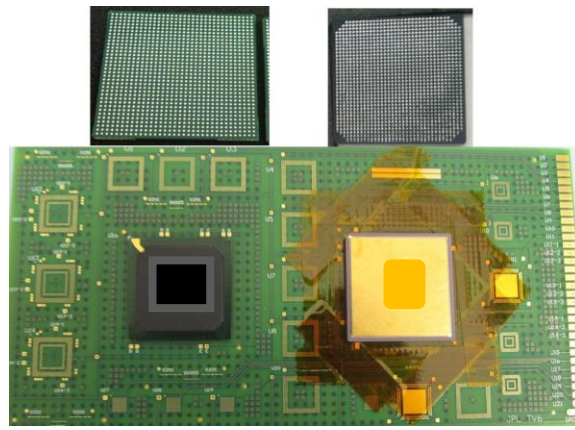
ENEPIG PCB surface finish for the assembly of plastic land grid array (LGA) with 1156 pads (left top) and ceramic LGA (right top). LGA1156 with ceramic version were assembled onto ENEPIG PCB finish (bottom).
